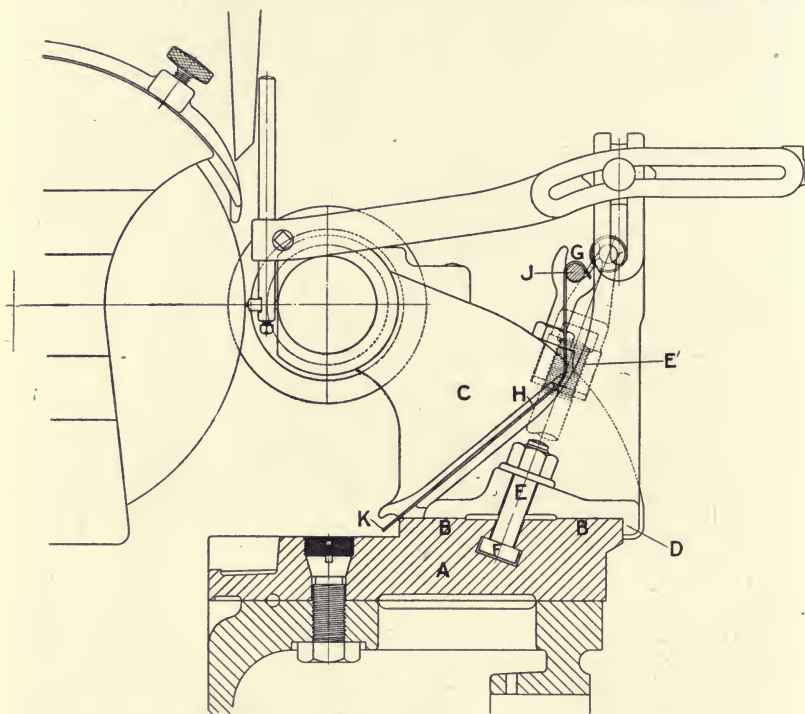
HEADSTOCKS, TABLE, AND GUARDING—LANDIS TOOL CO.
